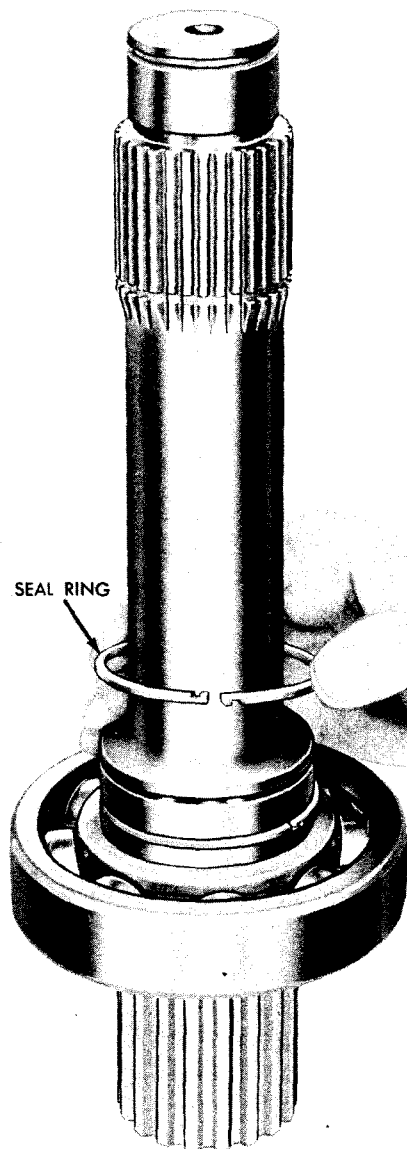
Removing (or installing) hook-type seal rings from output shaft
